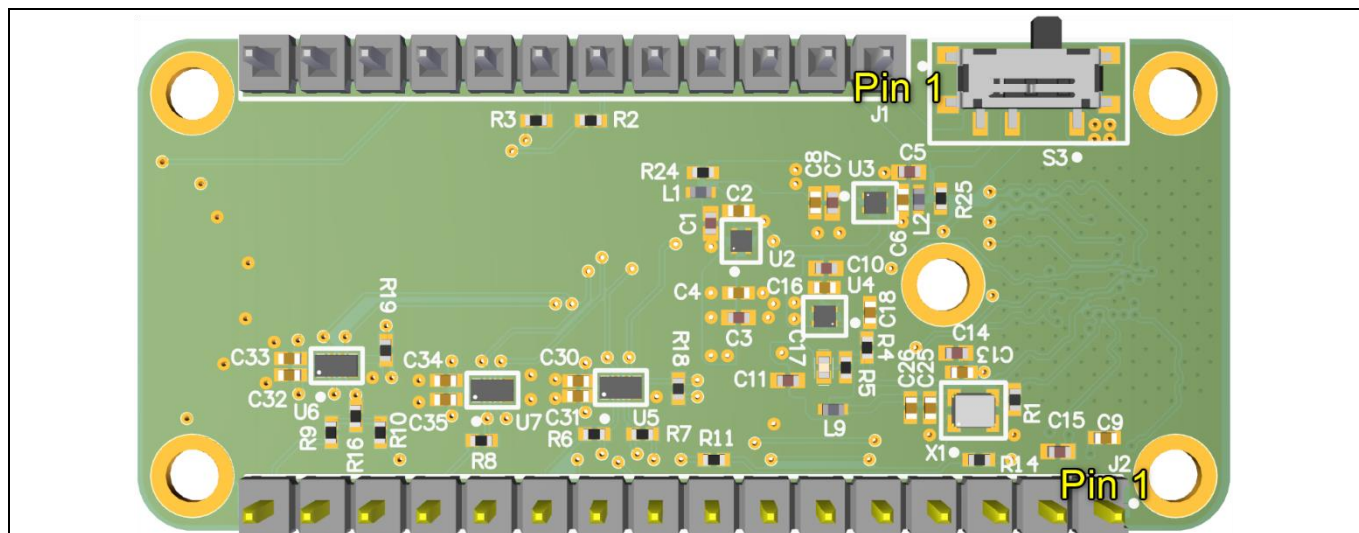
Adafruit headers and test points on bottom of the XENSIV™ BGT60UTR11AIP Radar Wing board
